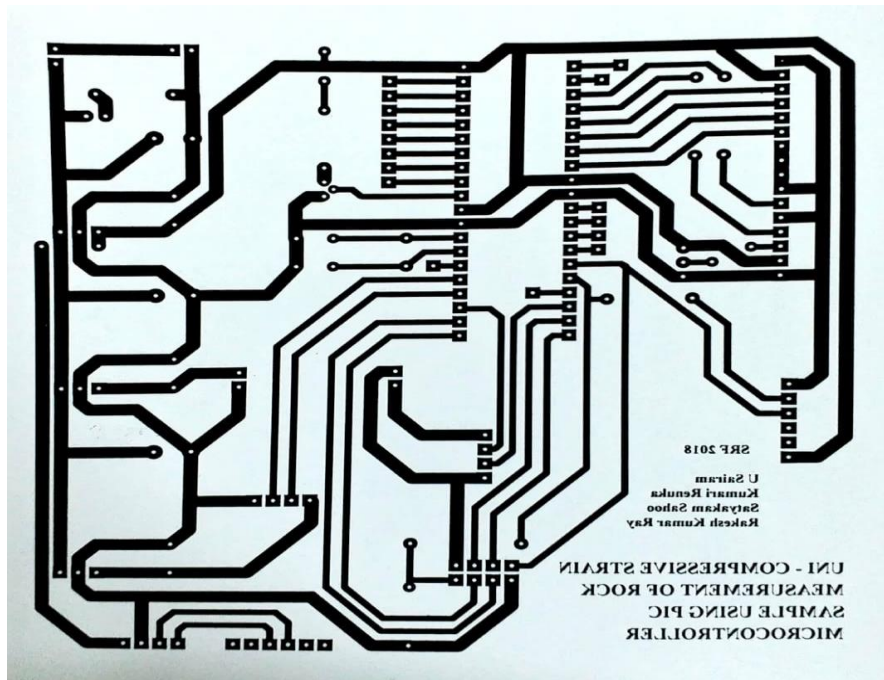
PCB DESIGN LAYOUT (Photopaper)
